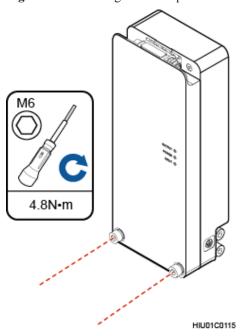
Closing the cover plate of an EXD3902 cabling cavity
